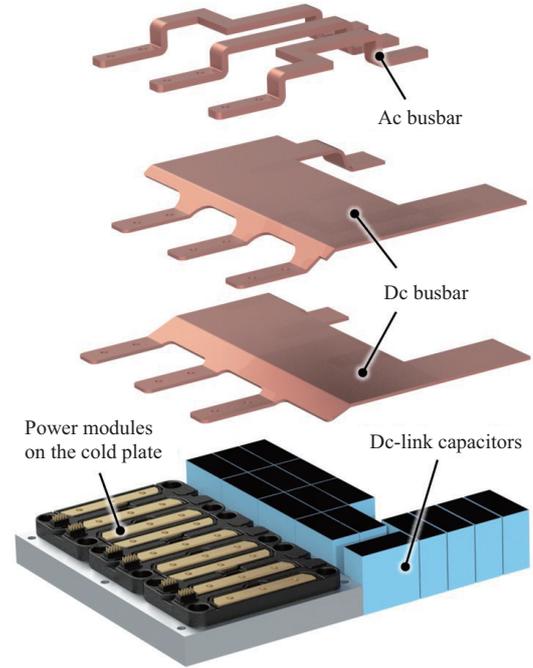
Exploded view of the busbar system, power modules, and the cold plate.
